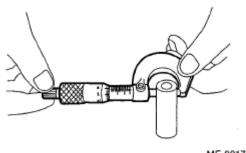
Checking Clearance Between Piston Pin And Bushing Courtesy of SUBARU OF AMERICA, INC.
